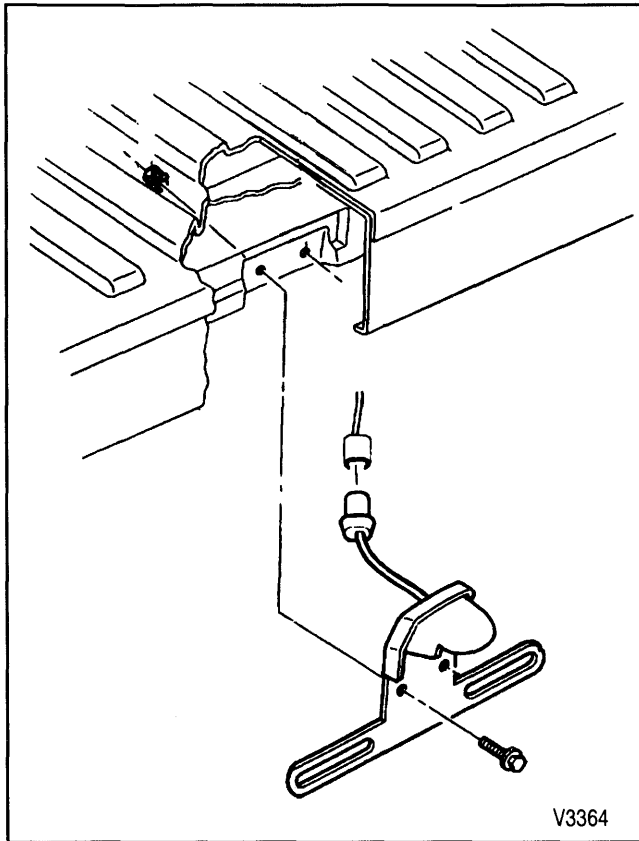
License Plate Lamp - Fleetside Pickup without a Step Bumper
